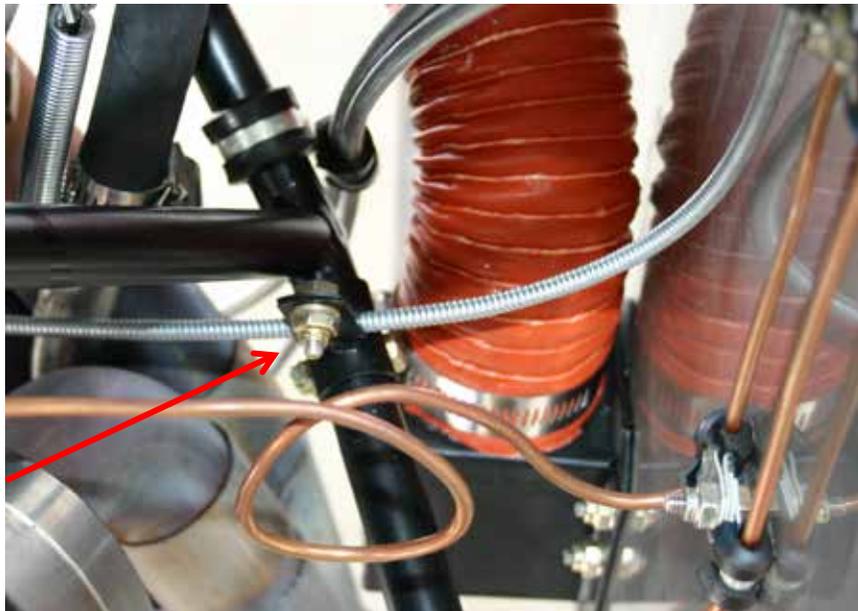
Mounting of the Mixture Cable to Engine Mount
